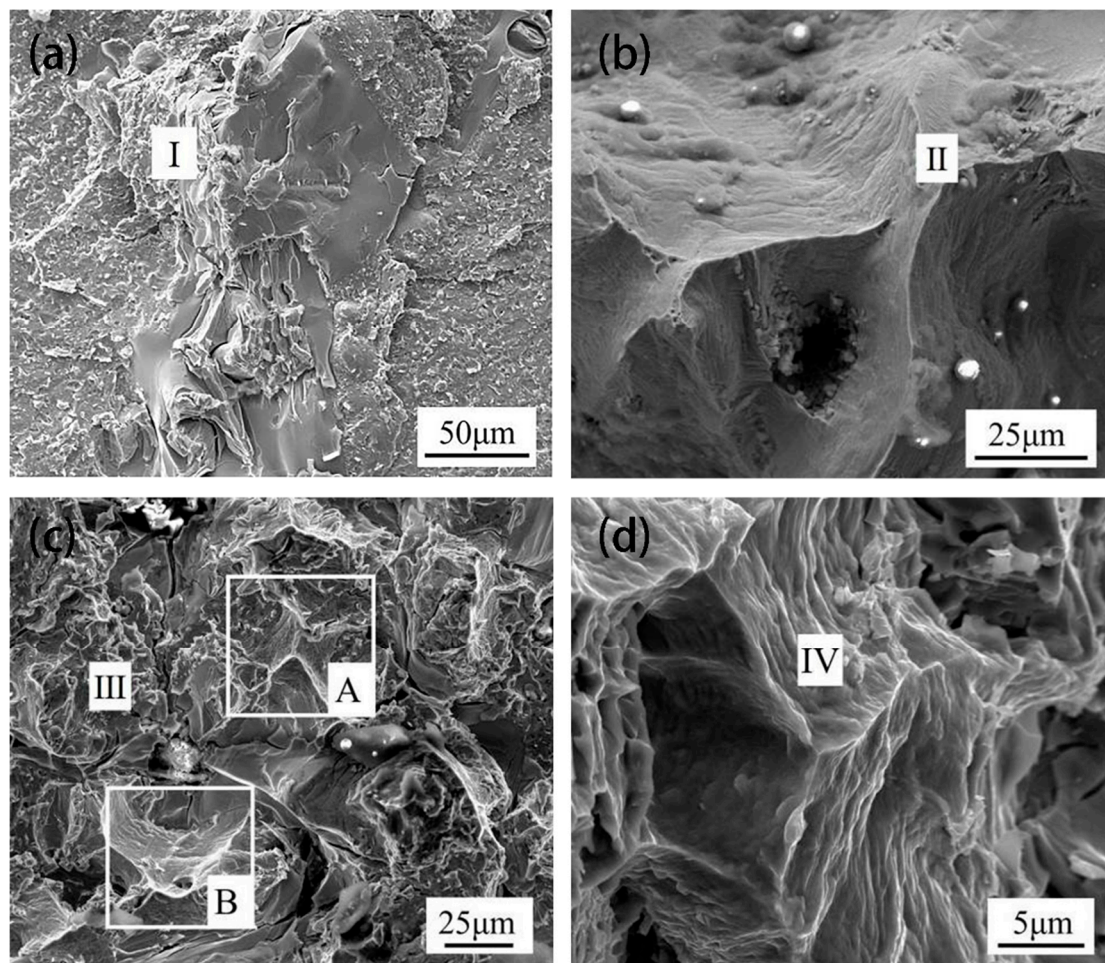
SEM images of fractured surface of TLP joints, with holding time (a) 5; (b) 30; (c) 60 and (d) 120 min.
